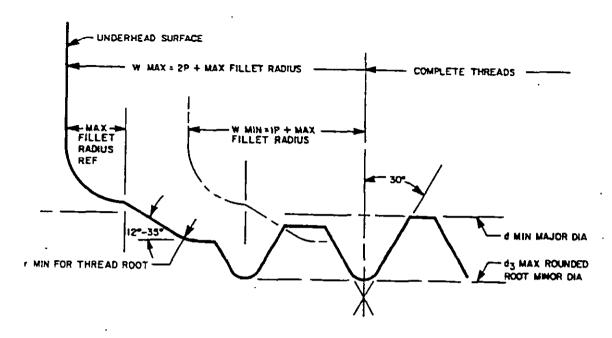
FULL SHANK FASTENER-THREADED TO HEAD
